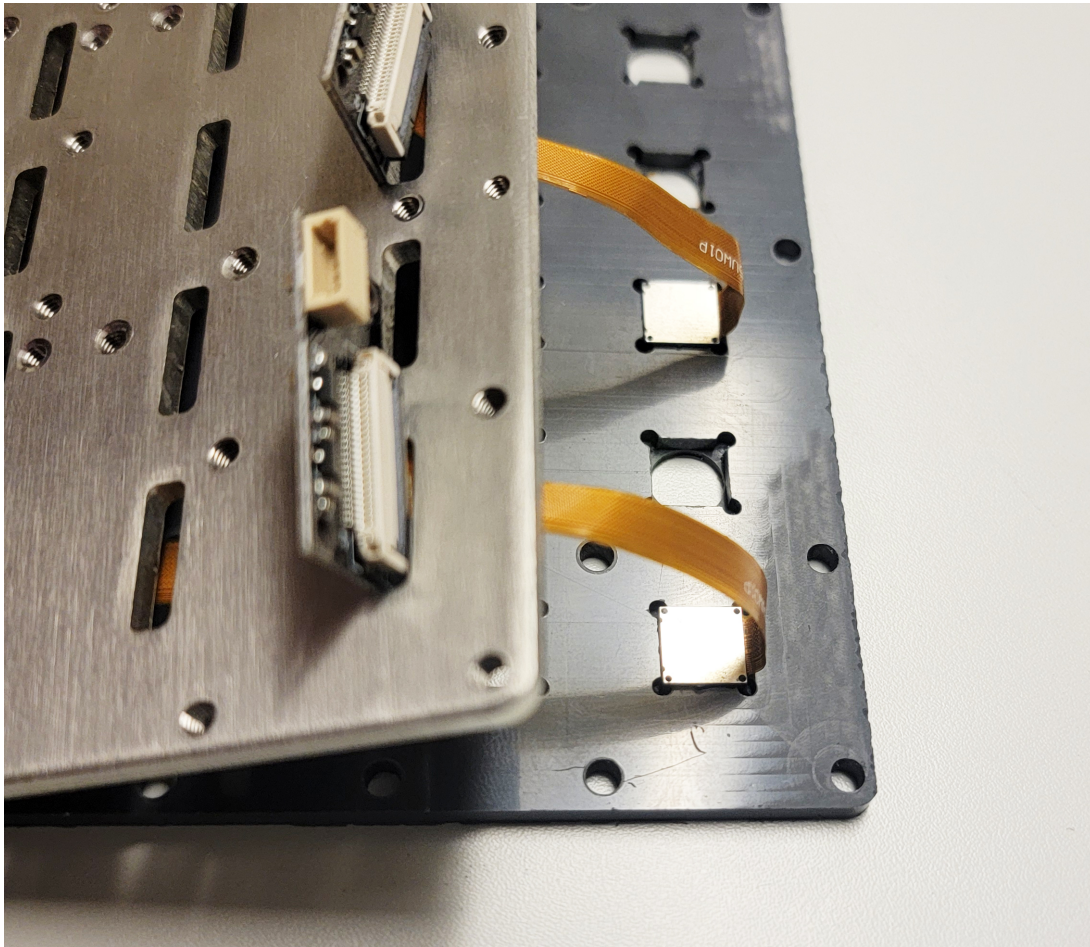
Detail of camera module mounting plate and camera module baseplate for 24 well device Analogous to the single camera device, a CNC milled camera module mounting plate holds the camera modules in 3D pockets which hold them in place by friction fit as well as aligning them in all axes. This camera module mounting plate is attached to the baseplate, which is shown overlaying it in this image. Note cutouts in the base plate for ribbon cable routing from the cameras as well as threaded mounting holes for the camera module holding plate, the extension tubes and the PCBs of the camera module USB video drivers.
